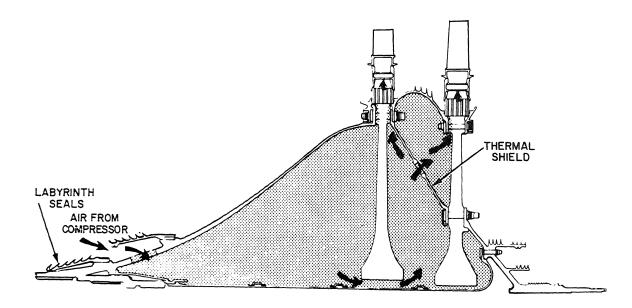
Gas generator turbine rotor cooling airflow.
